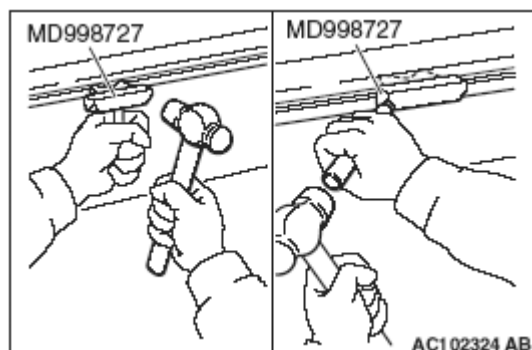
Removing Engine Oil Pan (3 Of 3)
